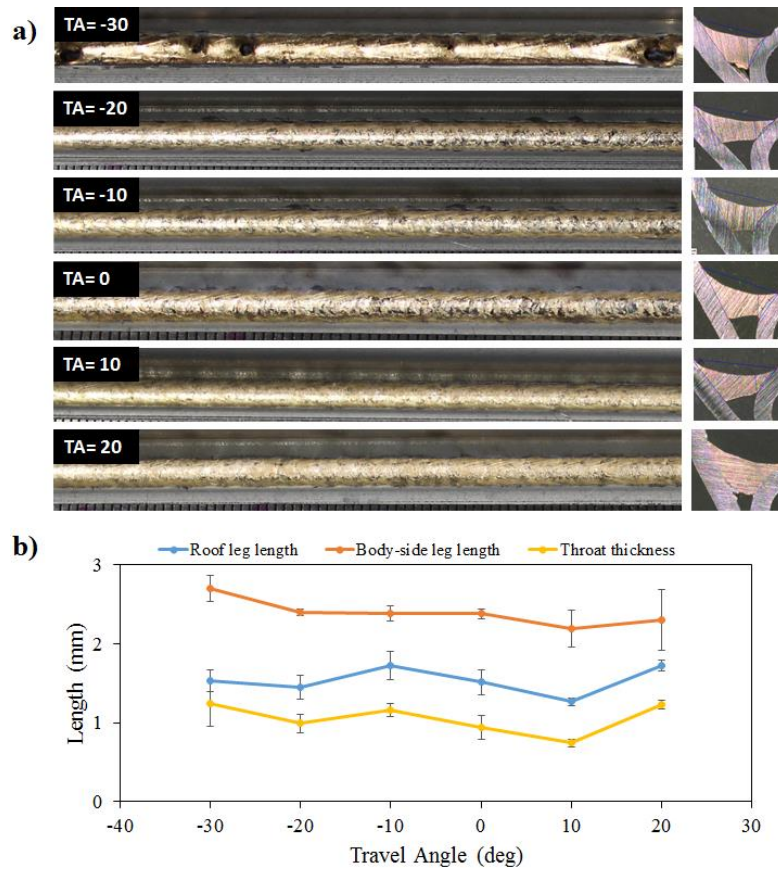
(a) Seam surface and micro section of brazed coupons at TA angles, (b) dimensional values of brazing seam.
